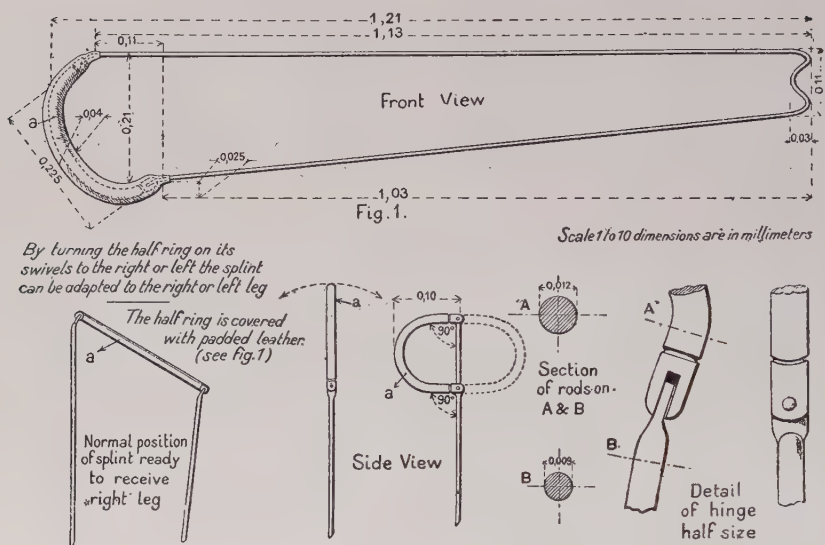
Mechanical drawing of hinged half ring traction leg splint. (Blake Keller.)
